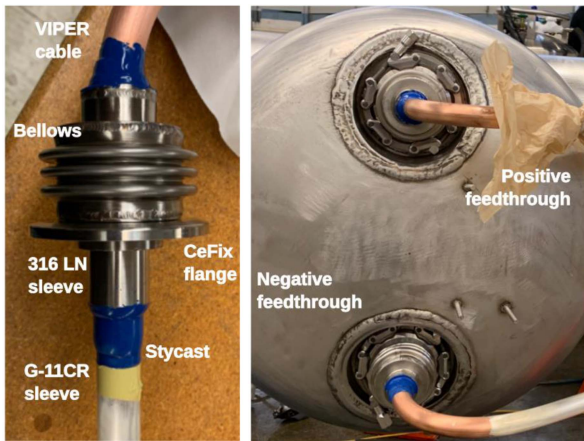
One of the high-pressure VIPER cable feedthroughs on the benchtop during assembly (left); both feedthroughs and VIPER feeder cables installed on the inlet plenum (right).
